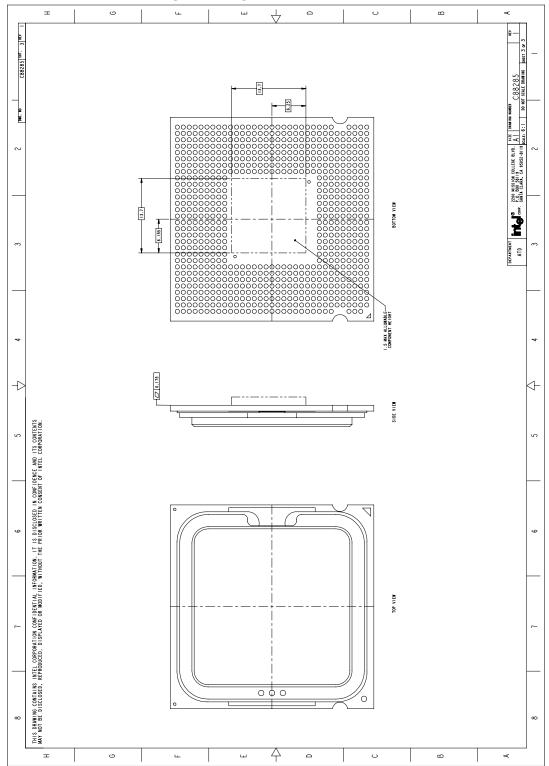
Processor Package Drawing Sheet 3 of 3
